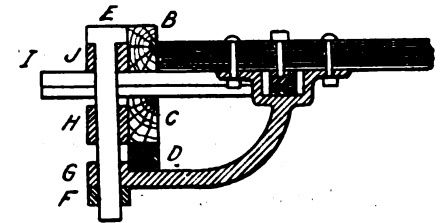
SECTIONAL VIEW THROUGH KING BOLT.
